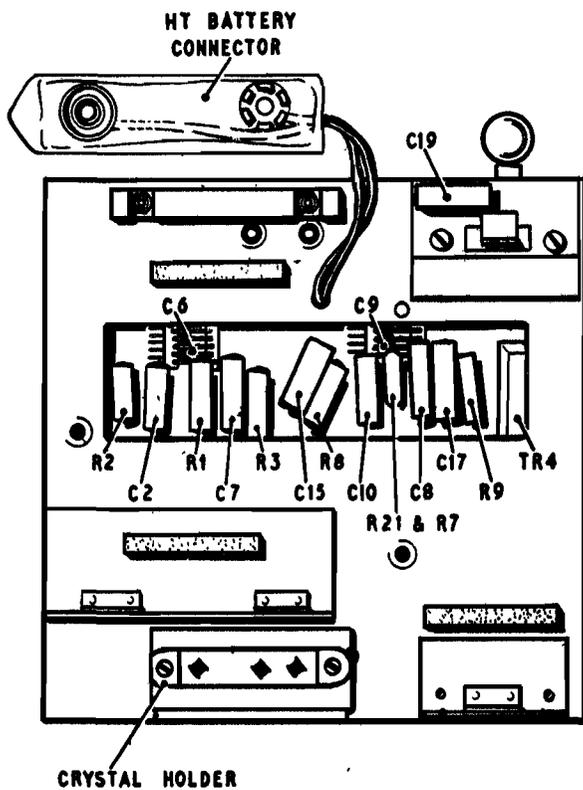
Test oscillator Type 7049, rear view batteries removed
